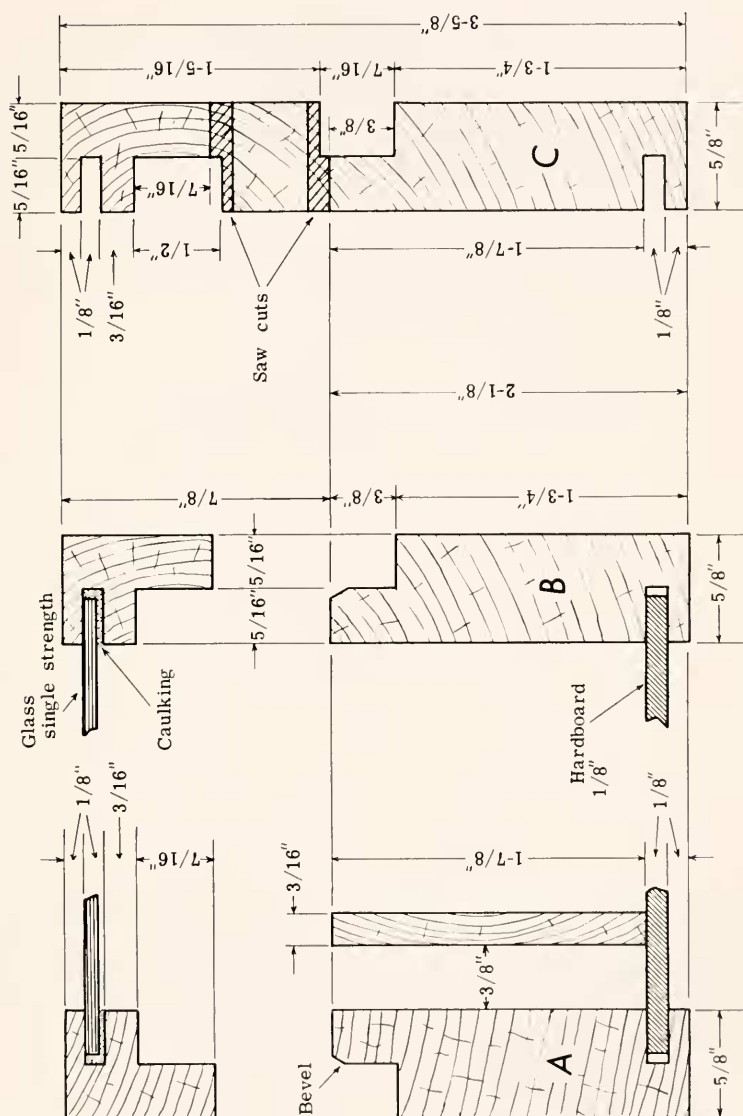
Sectional views of insect drawer to show construction. A, section through back. B, section through front or side. C, section through wood piece for front, back, or sides.
